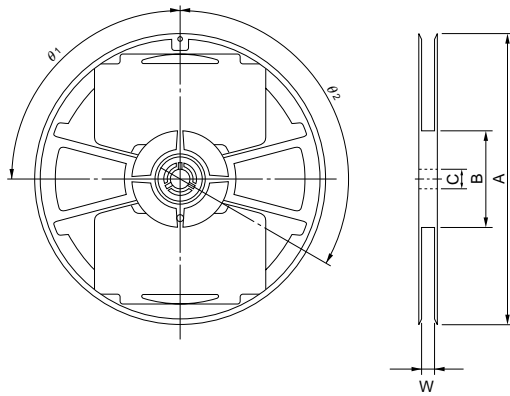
(B). MP-3Z Tape Dimensions (32 mm adhesive-type taping)
